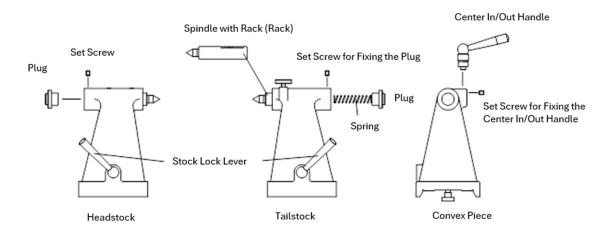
Adjustment of the Convex Piece and the Center In/Out Handle
